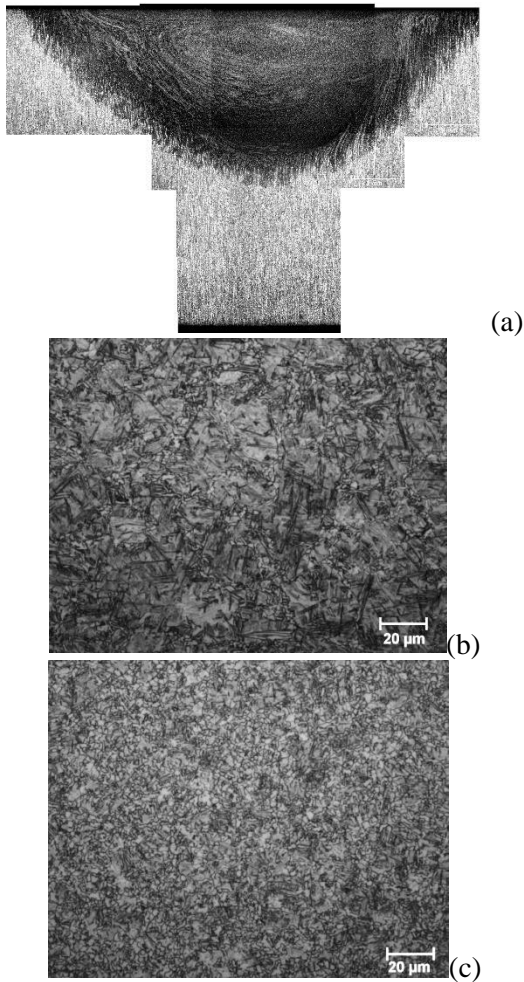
FSP of 1538-MV steel using a composite polycrystalline cubic boron nitride tool for a (a) weld nugget cross-section, (b) martensitic structure near the weld top surface, and (c) acicular ferritic structure near the weld bottom.
